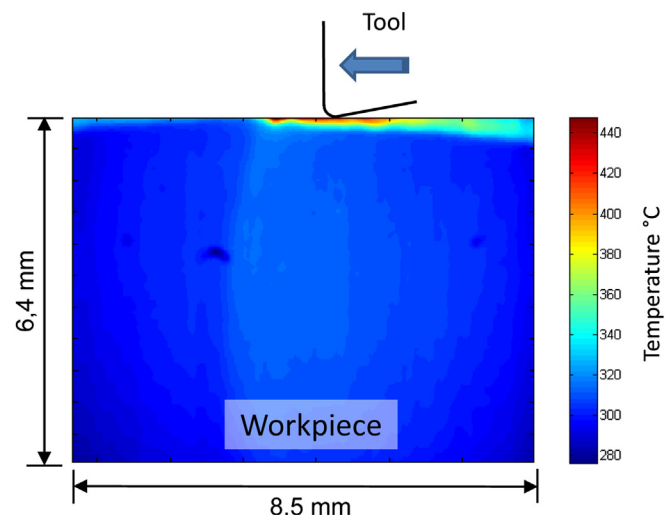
Temperature in the workpiece. The tool and chips are physically masked.
